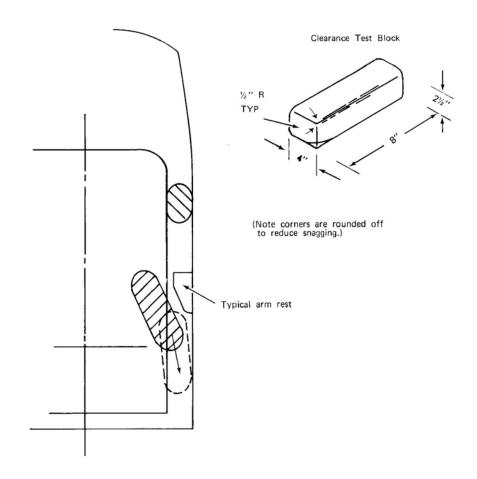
USE OF CLEARANCE TEST BLOCK TO DETERMINE HAND/ARM ACCESS
